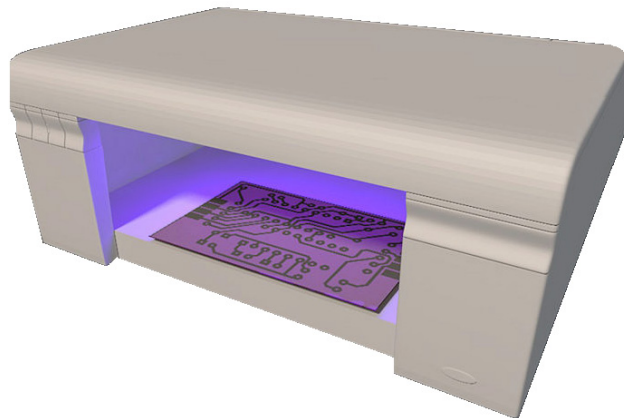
Turing on the ultraviolet machine and leave it a while with the board in
